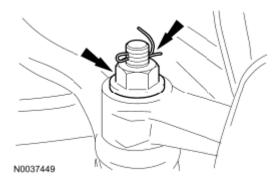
Locating Tie-Rod Ends Nuts And Cotter Pin Courtesy of FORD MOTOR CO.
